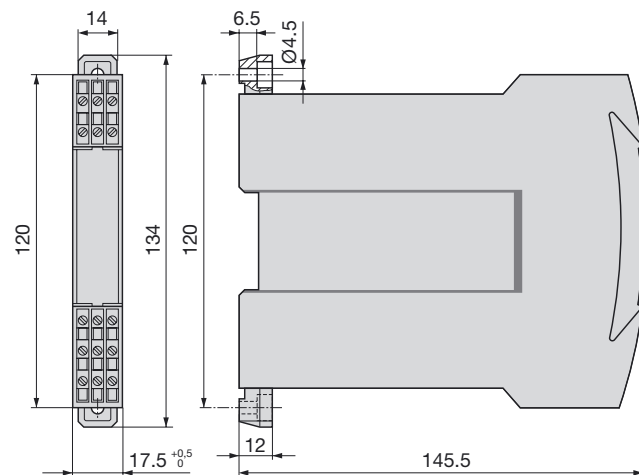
SINEAX TI 807-1 (housing S17) with the screw hole mounting brackets pulled out.
